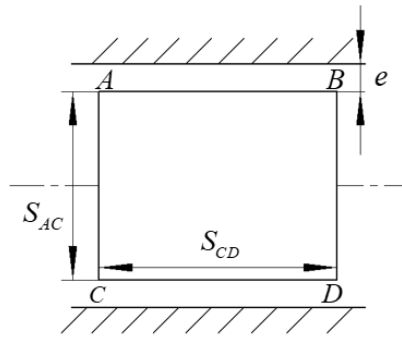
shows a moving pair with a gap between the crosshead guide plates
